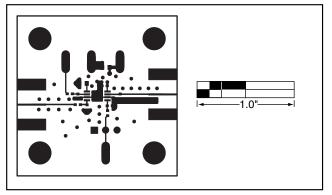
MAX2754 EV Kit PC Board Layout—Component Side
